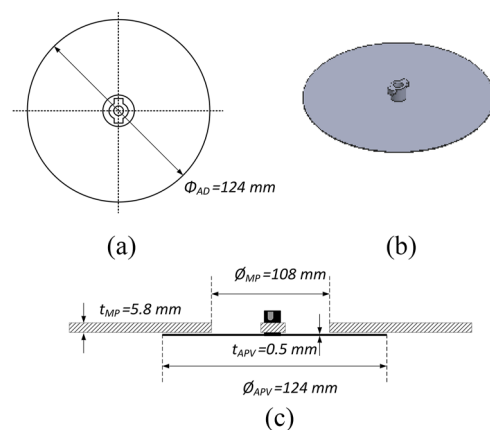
Nominal geometric parameters of the acoustic plate-valve. (a) Plan view. (b) CAD design. (c) Elevation view.
